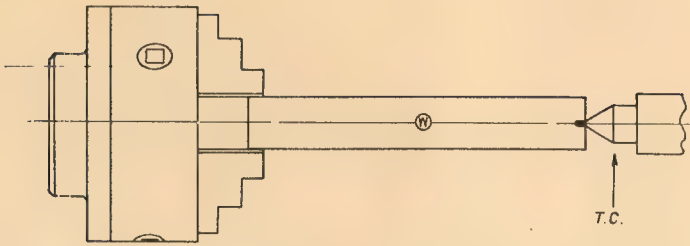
"Chuck and Centre" working. To obtain the best results, first lock tailstock centre in approx. position, place oiled centre hole of work *W* on to T.C. Pass other end of *W* between chuck jaws and, pushing *W* towards T.C., tighten chuck jaws
